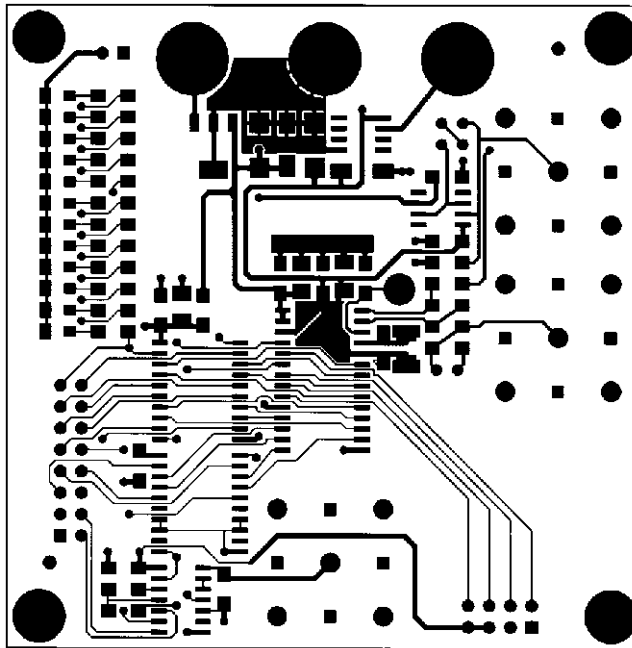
Suggested Evaluation Circuit Board Component Side Layout
